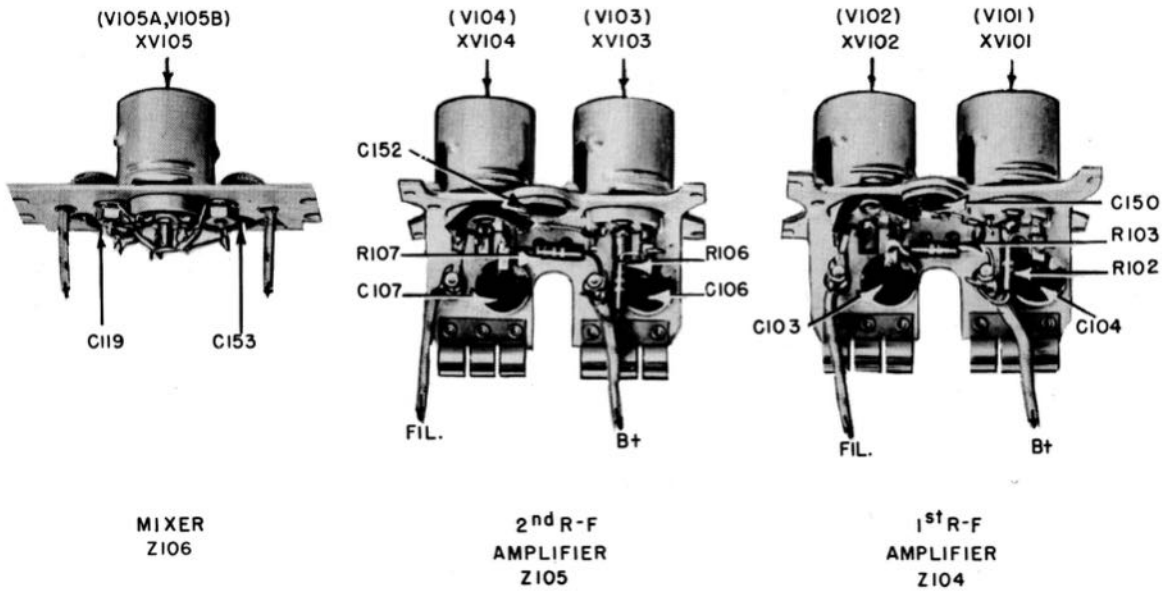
Socket Plate and Shield Assemblies from R-F Amplifier Section of Preselector
